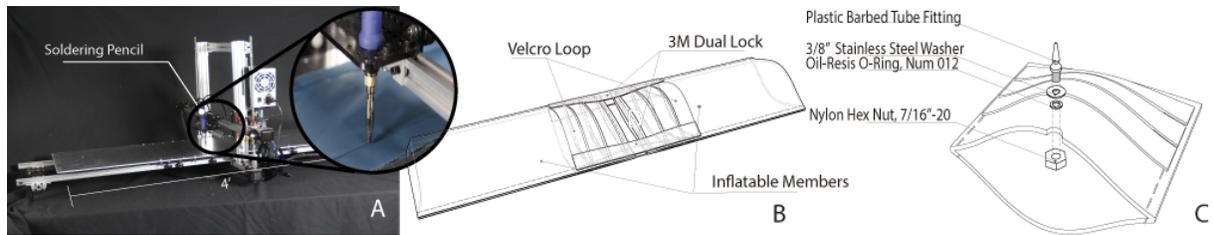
(a) Our customized heat sealing printer; Working condition of the soldering iron can be seen through inset. (b) Joints made between inflatable members with velcro hook and loop. (c) Exploded view of the composition of the inlet valve system.
